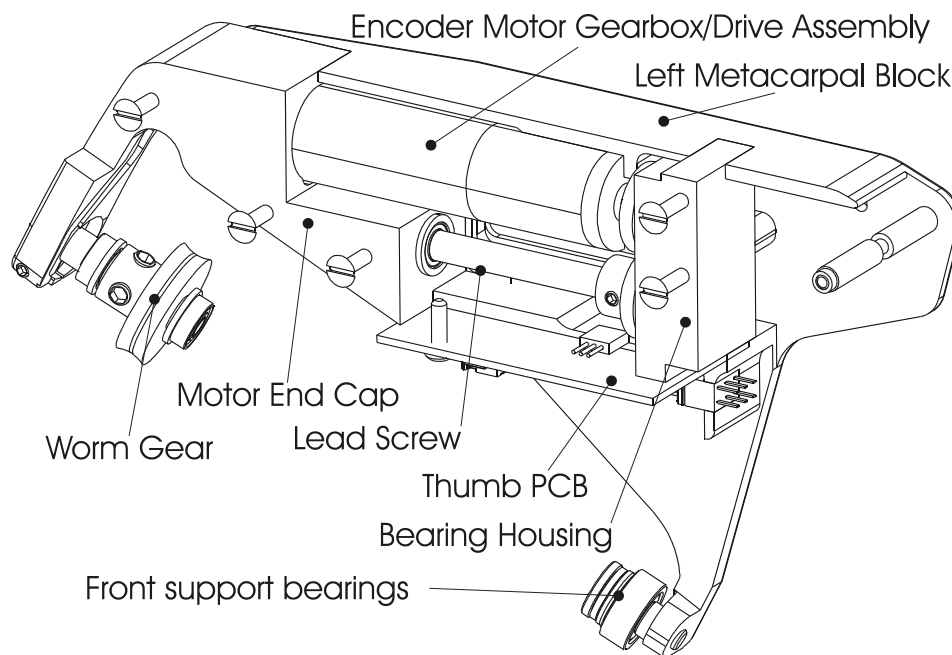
Metacarpal Assembly (with Right Metacarpal Block removed)
